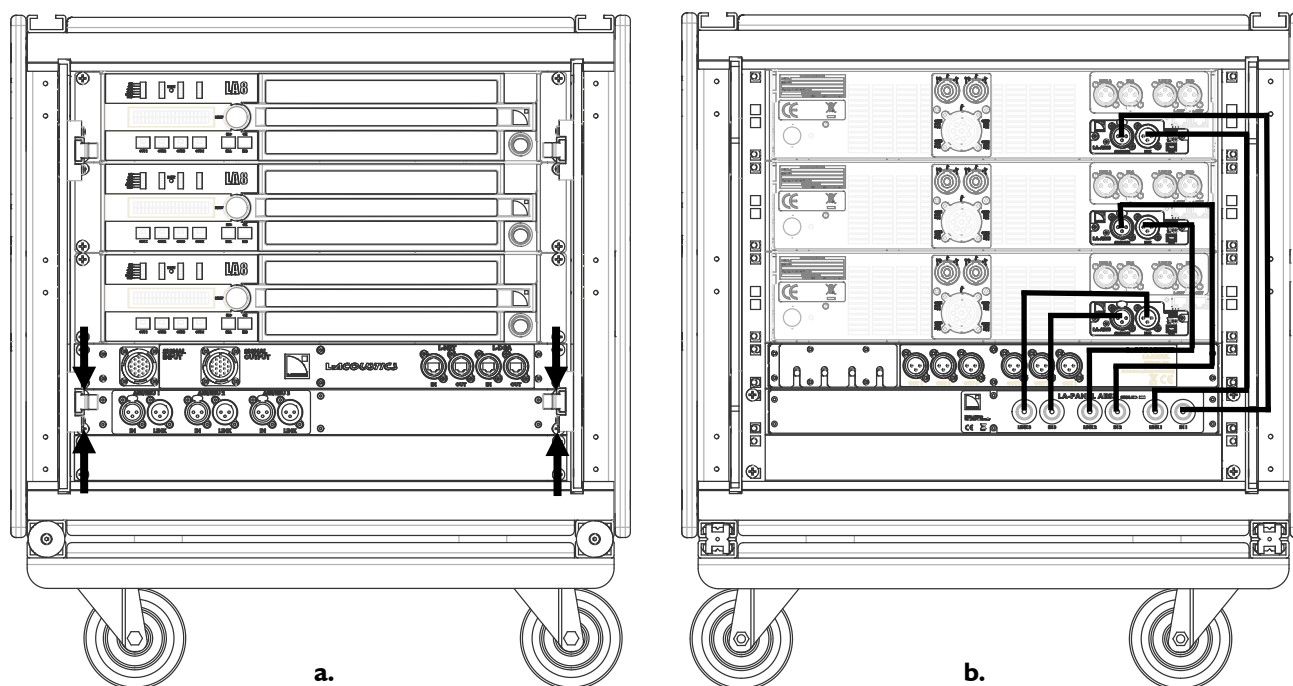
LA-PANEL AES3 mounting and wiring (LA-POWER not represented)
